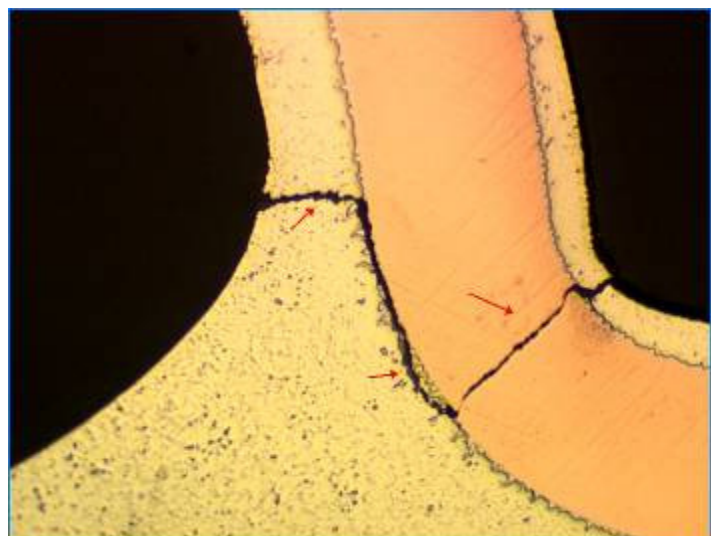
cross section, SN65, U41, right lead and solder crack, 200x
